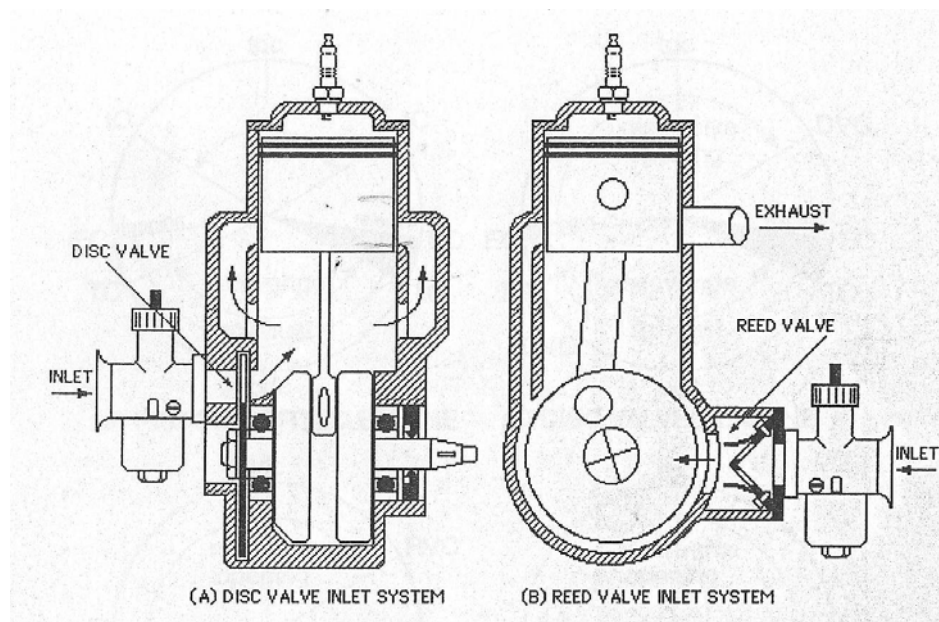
Engines with disc type (A) and reed valve (B) inlet systems
